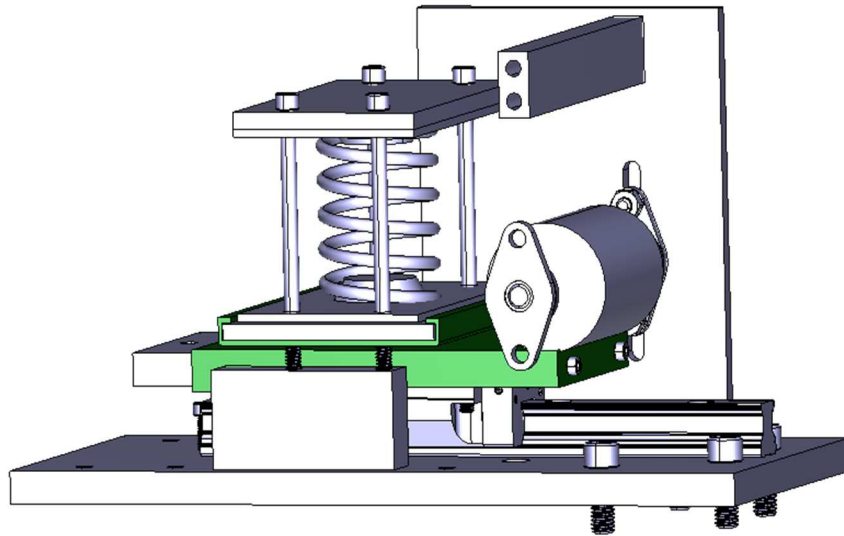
Inter-laminar Shear and Tack Testing Fixture
